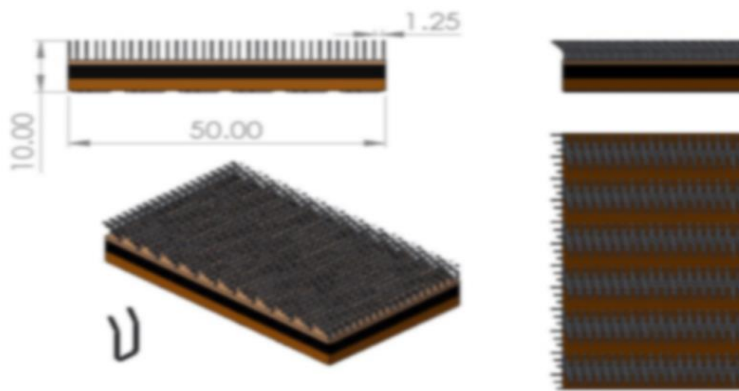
Mechanical Design and Dimensions of The Card Clothing
